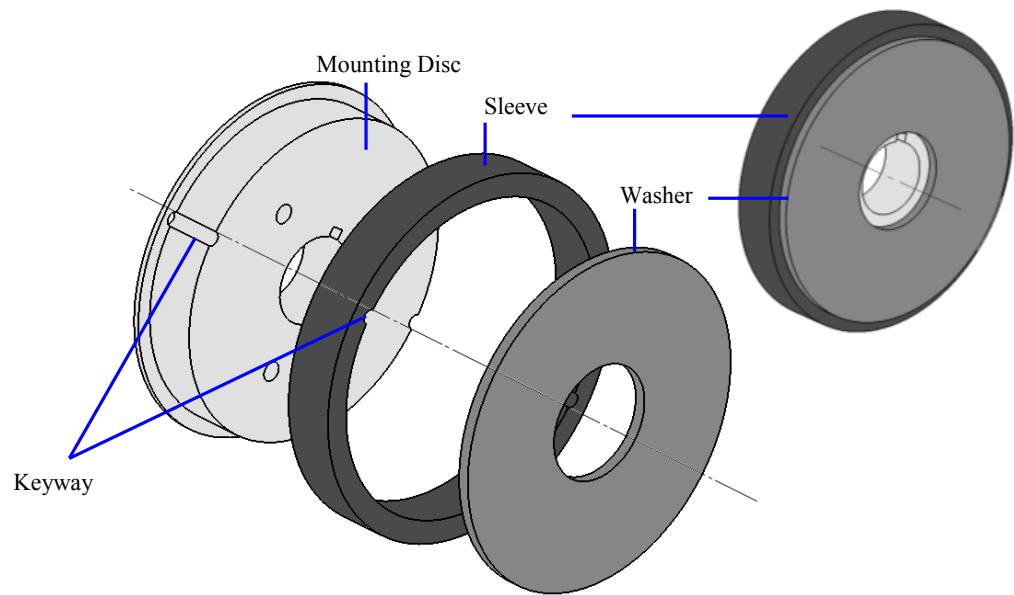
Drawings of the lower specimen assembly in its exploded and assembled forms.
